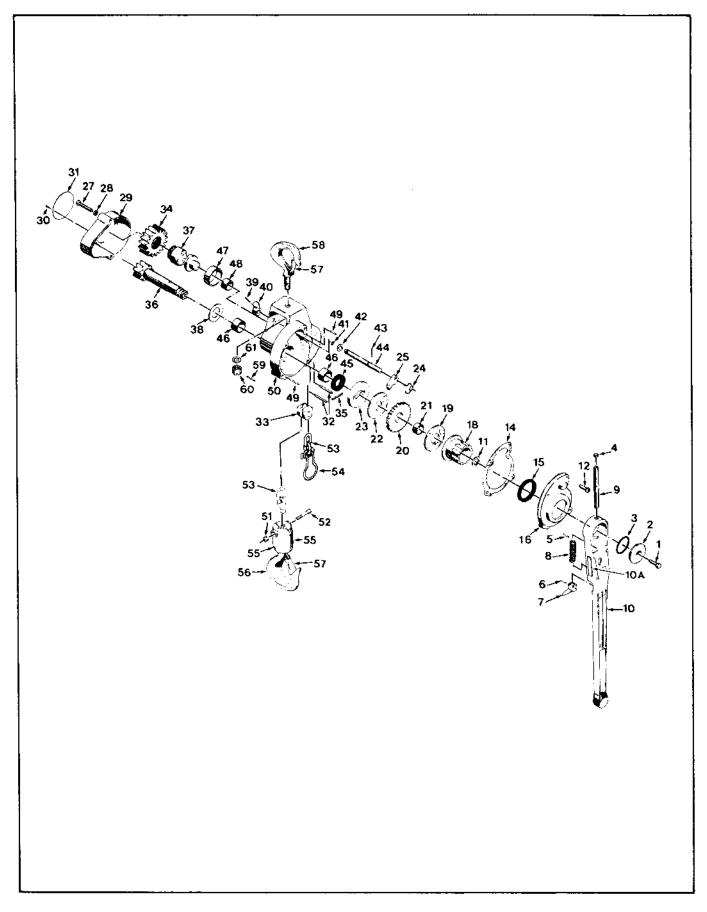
EXPLODED ILLUSTRATION OF MODEL MA-30 HOIST
